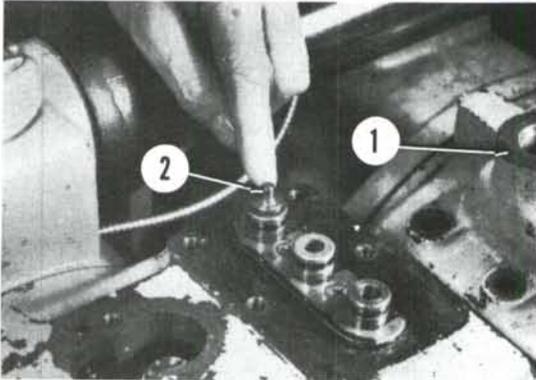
To check system pressure on models with rear mounted pump and not equipped with a remote valve, remove connector plate (1) and install special plug (2) as shown. Reinstall connector plate and install a 0-20000 kPa (0-3000 psi) gage in plate test port.
